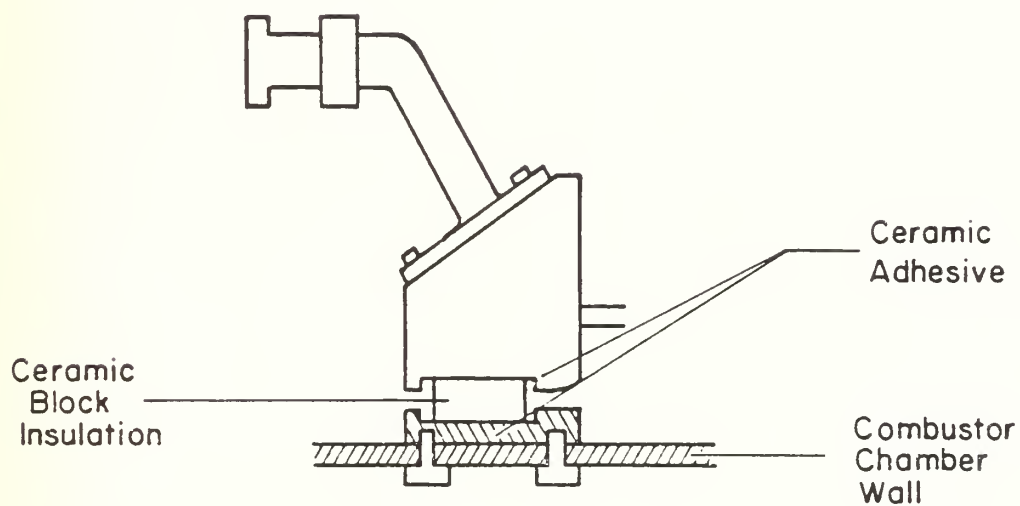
INSULATING THE FUEL SPRAY NOZZLE MOUNTING
